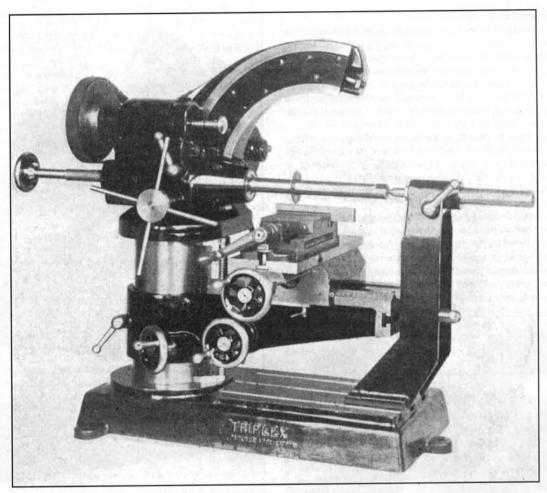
The "Triplex" Tool as a Horizontal Miller.
